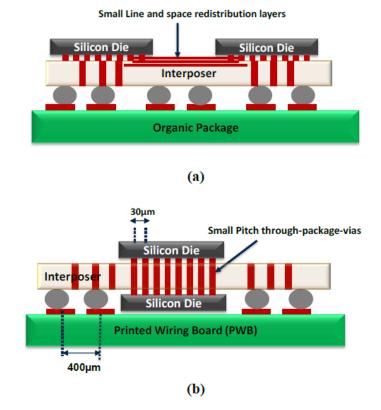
Schematic of: (a) 2.5D packages, (b) 3D packages (Courtesy of Vijay Sukumaran of Georgia Tech PRC).
